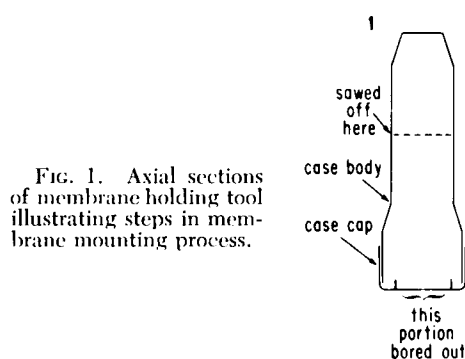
Axial sections of membrane holding tool illustrating steps in membrane mounting process.
